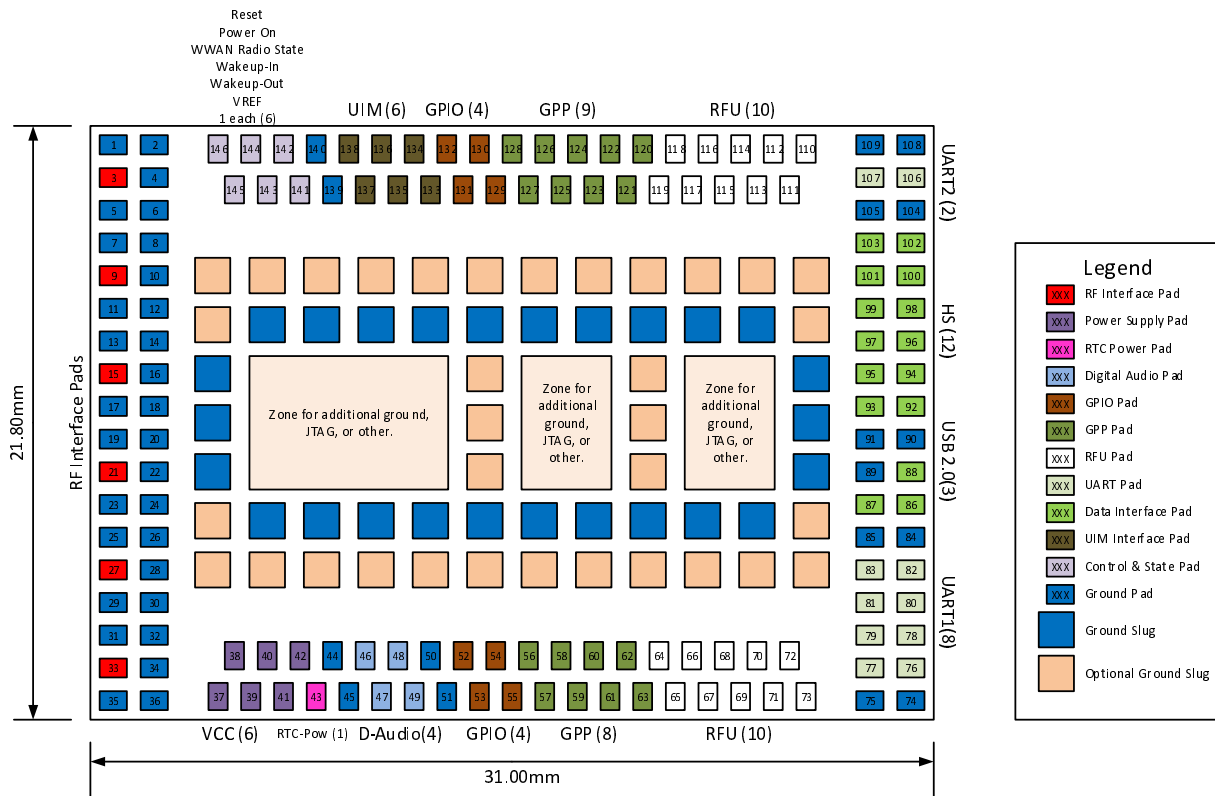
SMT3122 physical form factor (676 mm<sup>2</sup>), dimensions, pad numbering and placement
